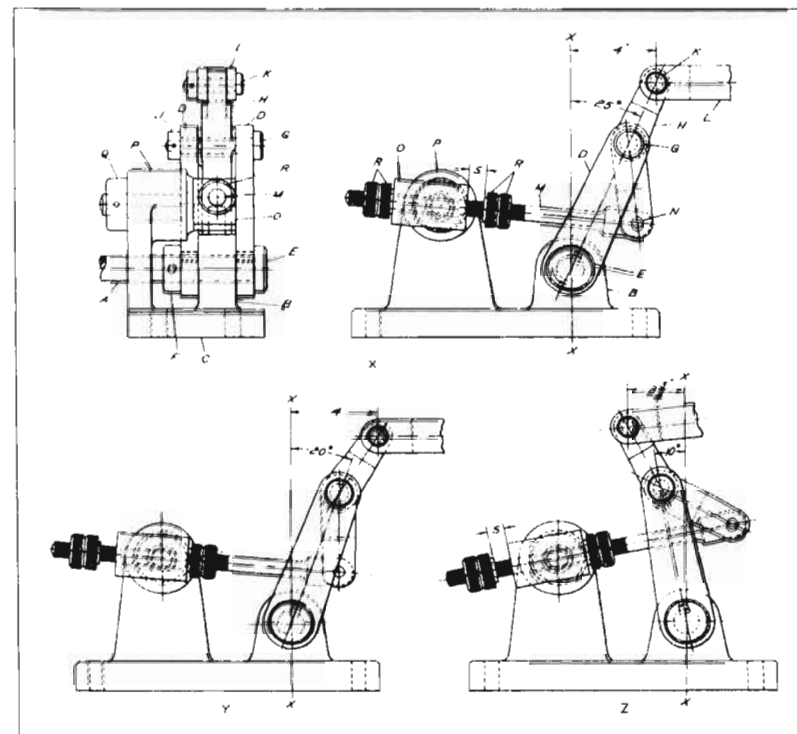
Knurled nuts of the lever type driving mechanism here shown may be adjusted during operation to vary the dwell duration and also the points of connecting-rod reversal.
